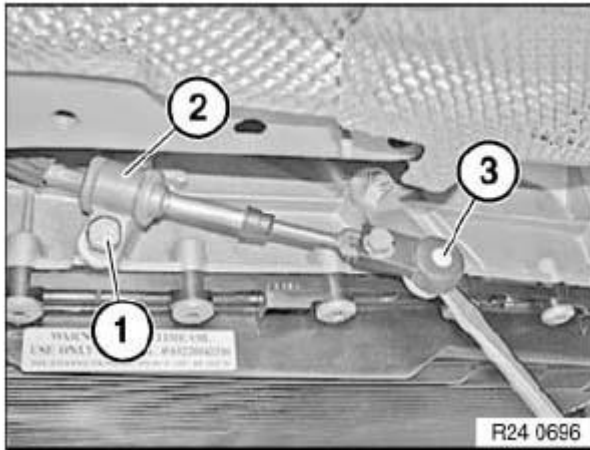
Releasing Shift Cable Head Using Screwdriver
